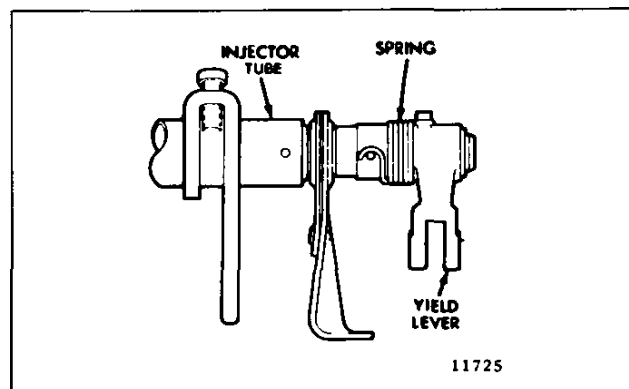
Throttle Delay Yield Lever (In-line Engine)
